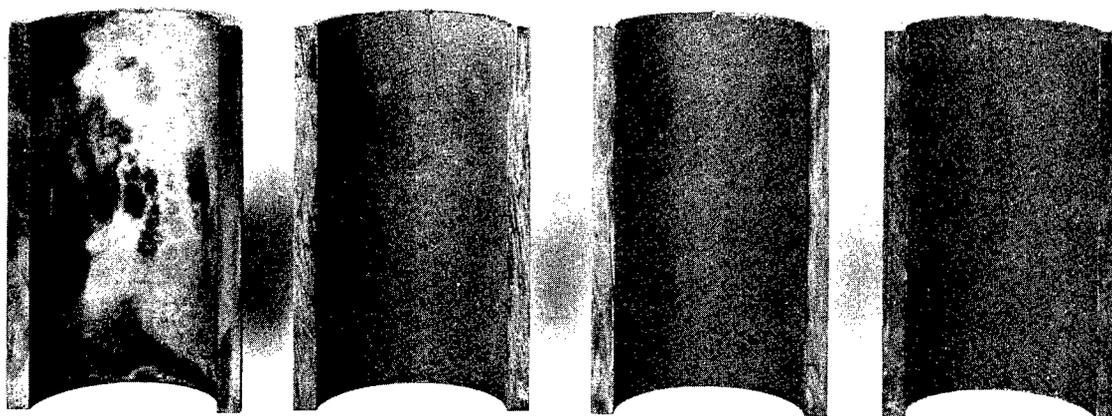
Half sections of mold inserts included in casting experiment melt C226 (left to right: uncoated insert 47, Gd₂O₃ coated inserts 46 and 57, and Y₂O₃ coated insert 49)
